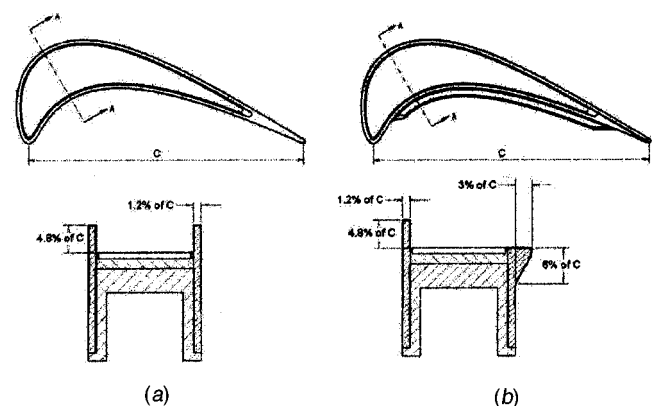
Top view and cross-sectional view of blade tip Assemblies—(a) squealer tip, (b) winglet-squealer tip
